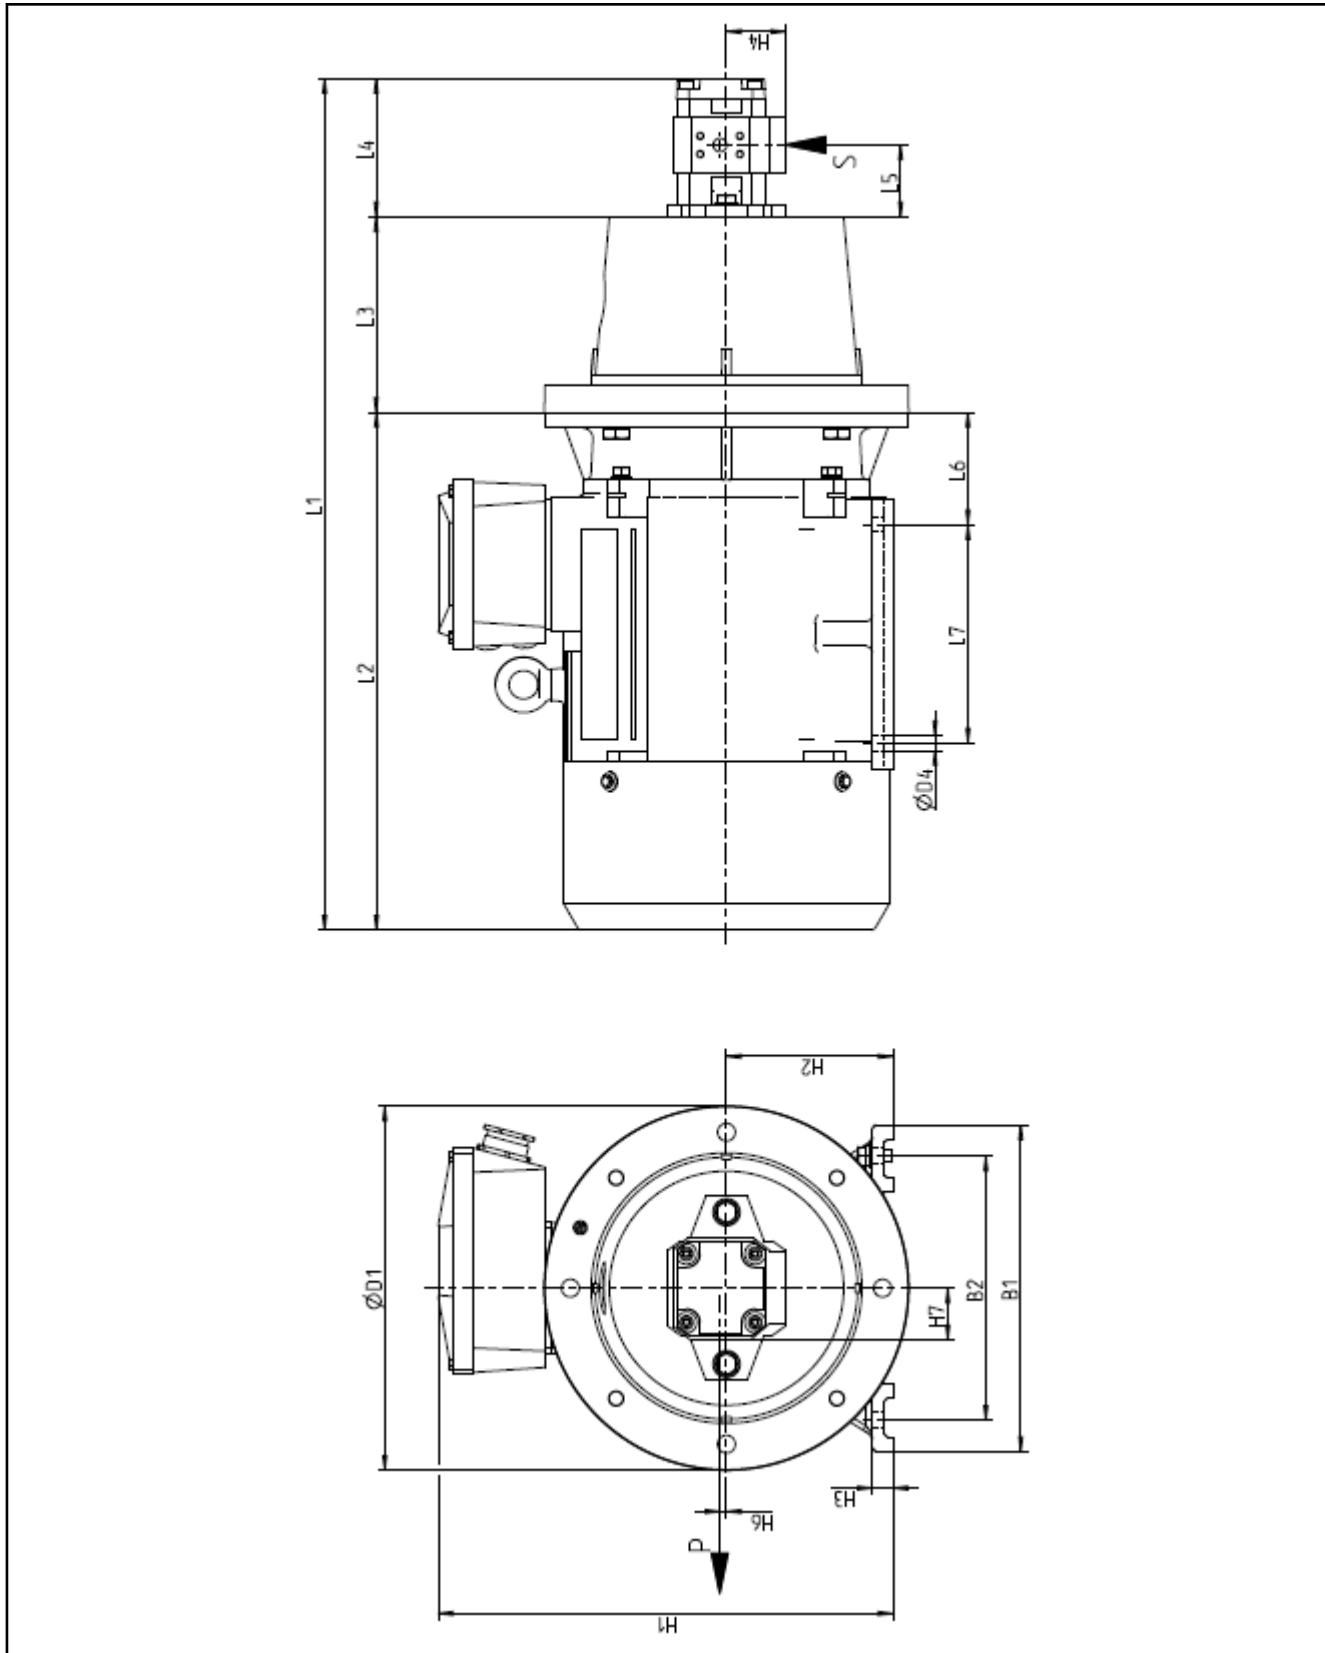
Dimension sheet "MPES2" with "PGH3" in the fastening mode "A" (horizontal foot fastening)
